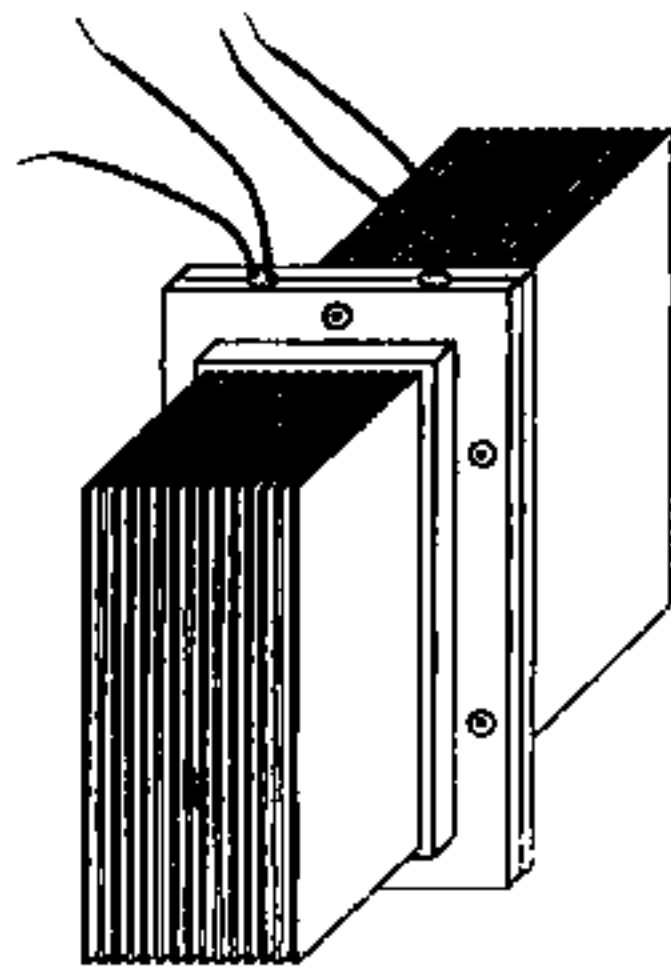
Back-to-back Heat Sink Prototype Assembly
